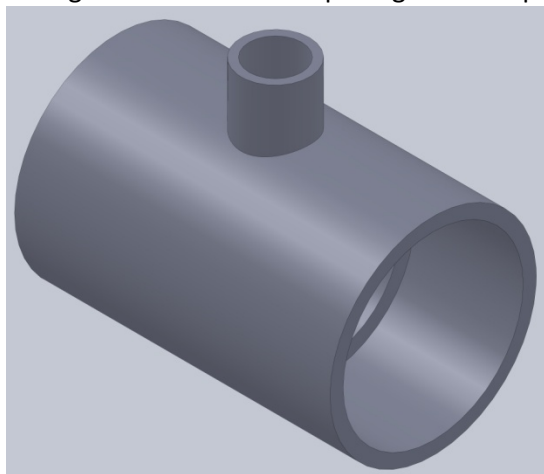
Height adjustment tee with 2-1/2" pass through and 1/2" top opening.
